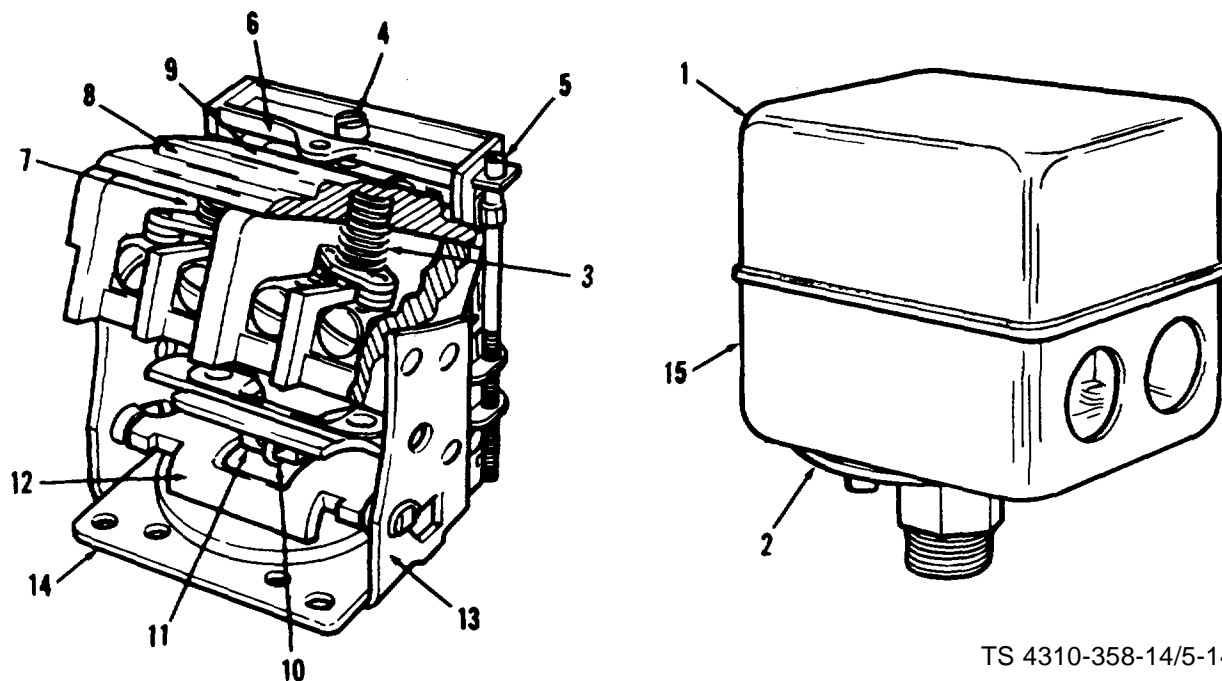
Pressure switch assembly, removal and installation (shown with cover removed).
